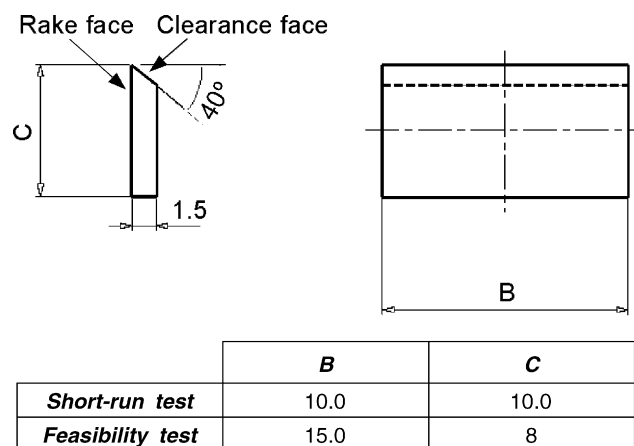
Final dimensions CMC cutting tools (not to scale). All the dimensions are in millimeter.
